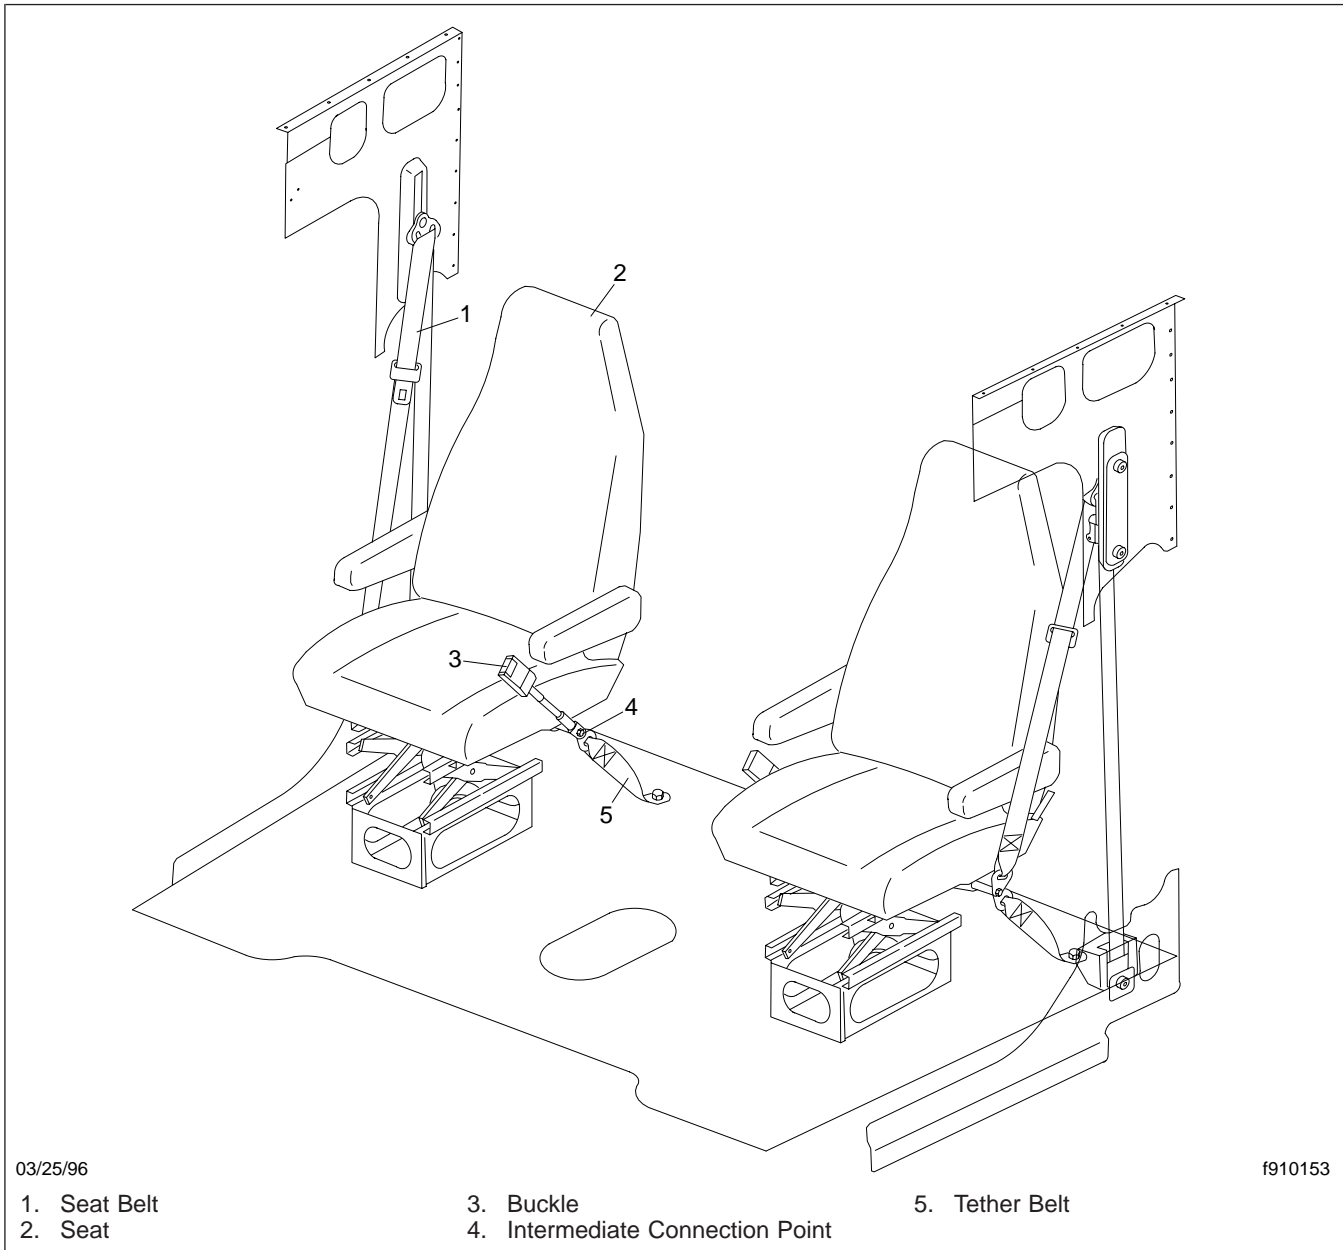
, Seat Belt/Tether Belt Assembly (dual adjustable seats shown)
